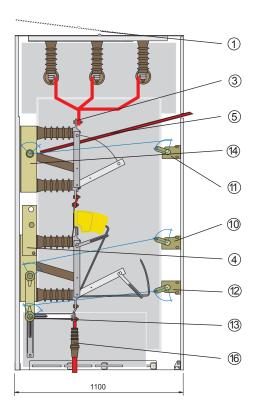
24 kV Cable panel with disconnecting switch and switch-disconnector H 22
